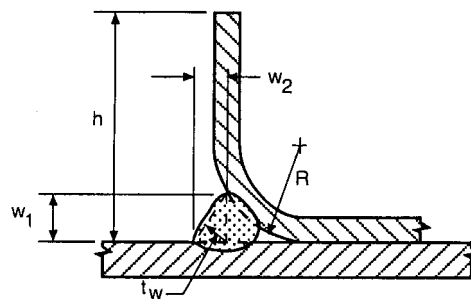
Throat thickness t_w of a flare-bevel weld
